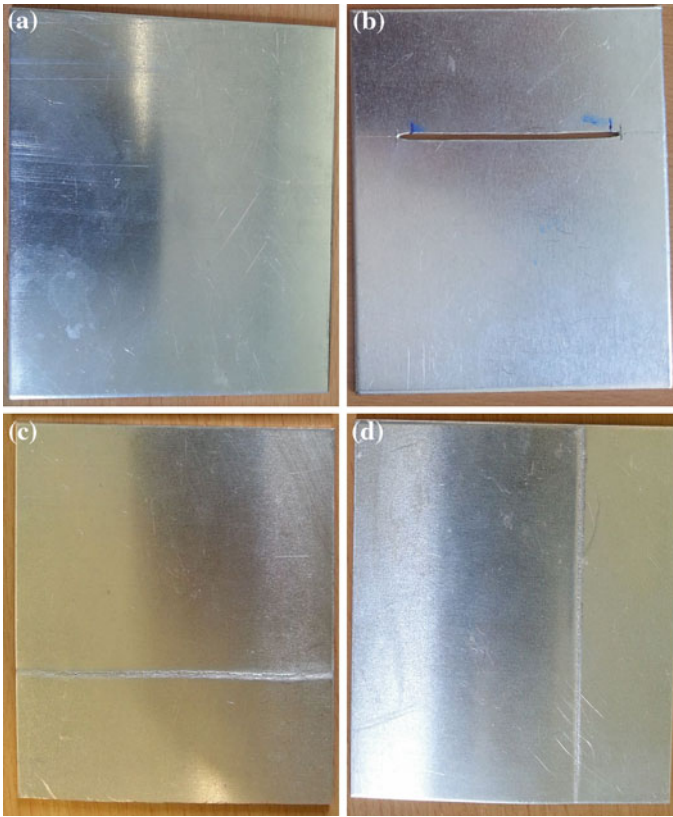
Aluminum plates with a no defect, b horizontal defect, c horizontal crack, and d vertical crack
